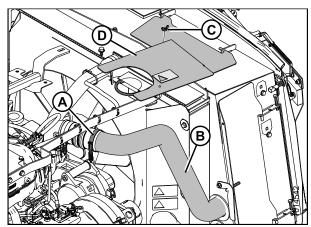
Charge Air Cooler Tube and Exhaust Shroud (Exhaust Stack Removed for Clarity)
